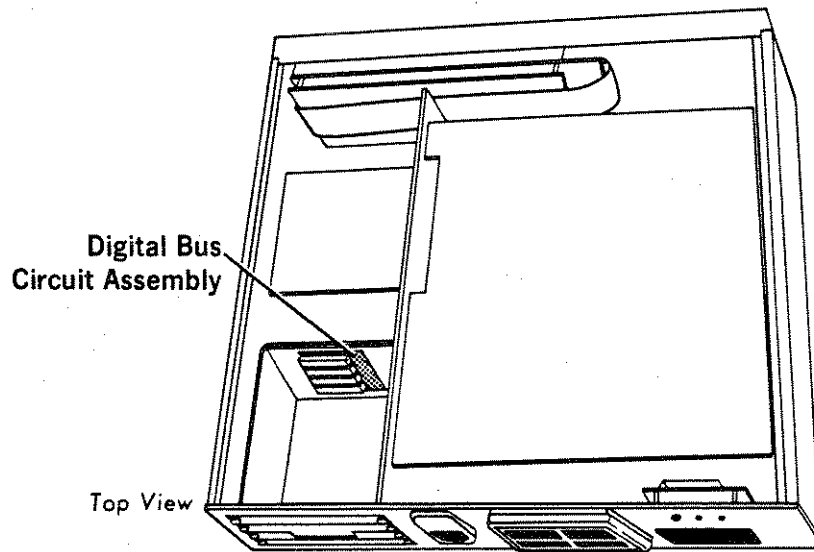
Location of Digital Bus Circuit Assembly (P/N 59670)
